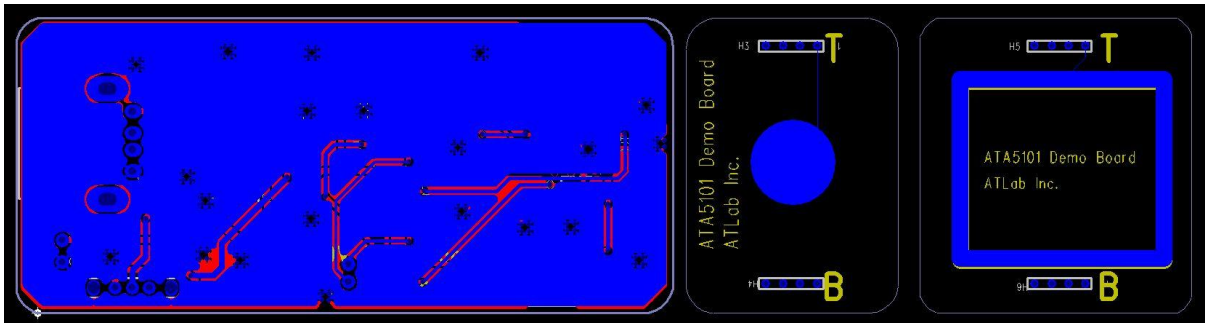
ATA5101 Demo Set PCB Layout (Bottom Layer)
